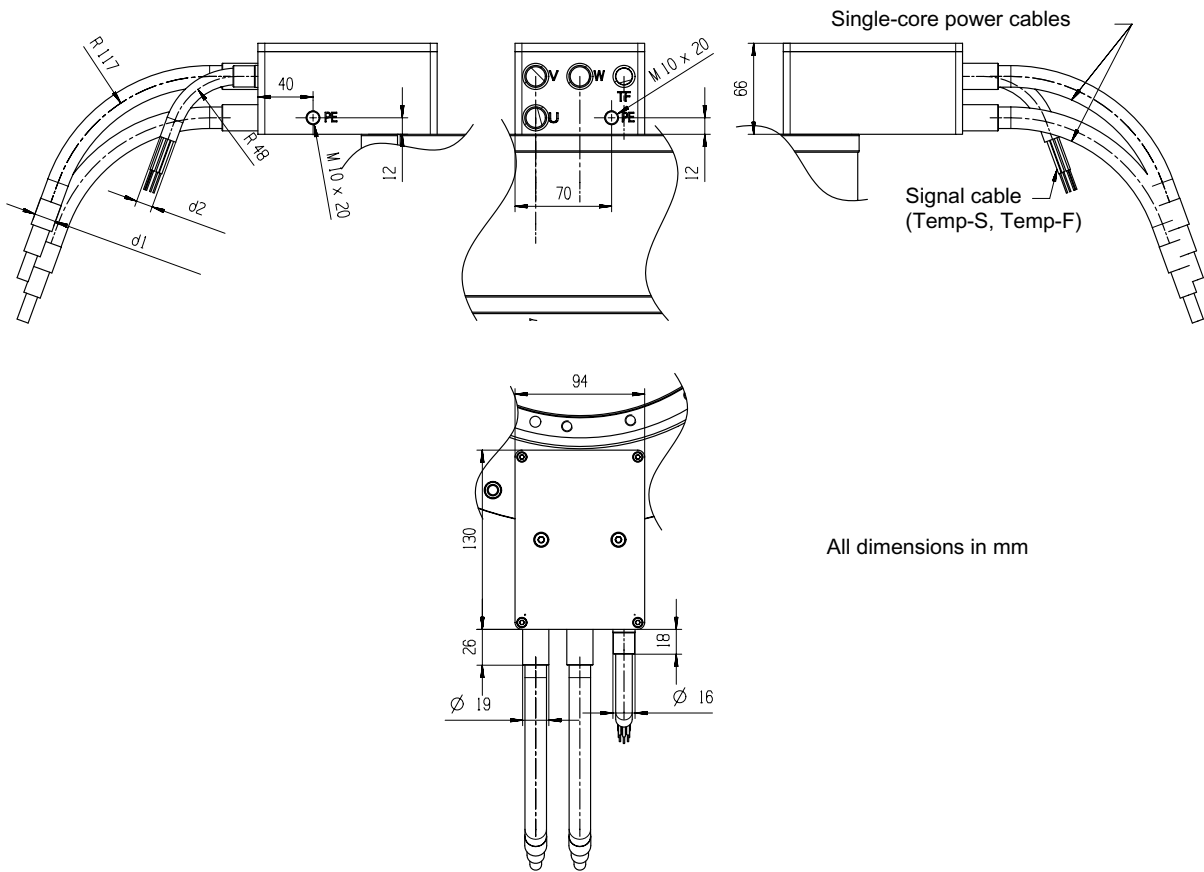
Radial electrical connection towards the outside with sleeve and single core for 1FW6230, 35 mm² core cross-section
